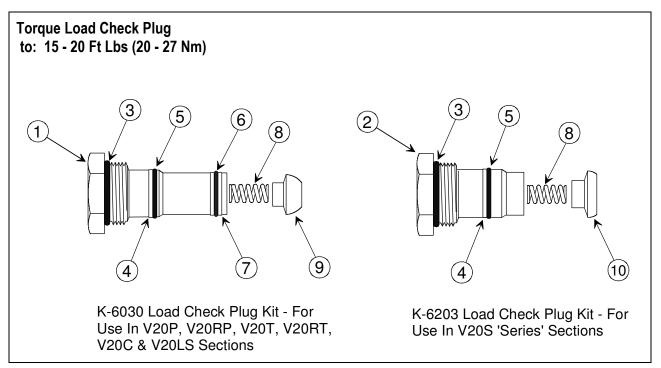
K-6030 and K-6203 Load Check Plug Kits
